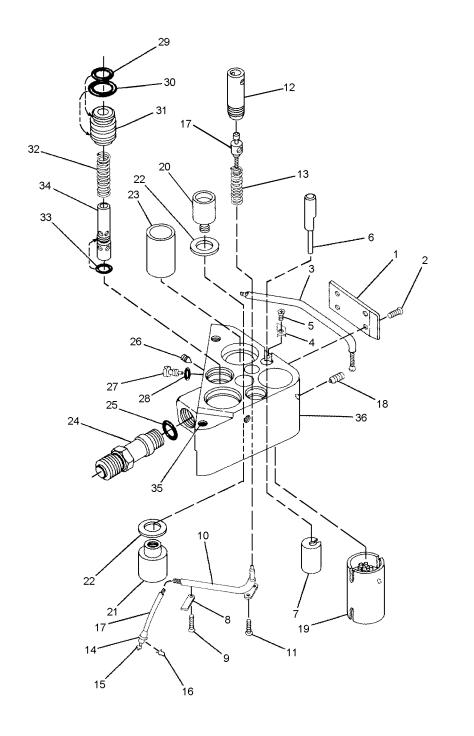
Intermediate Block Assembly-1 (Scott)
